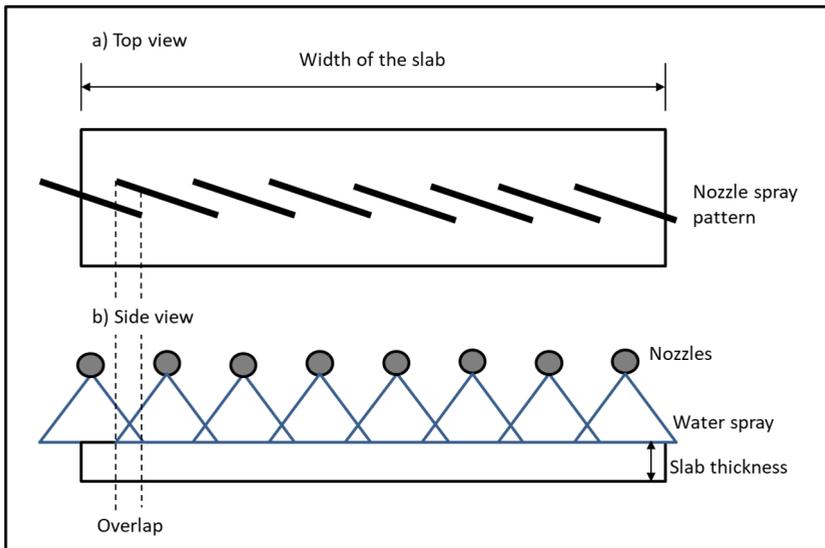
Spray pattern of the nozzles of a primary descaler [11].
